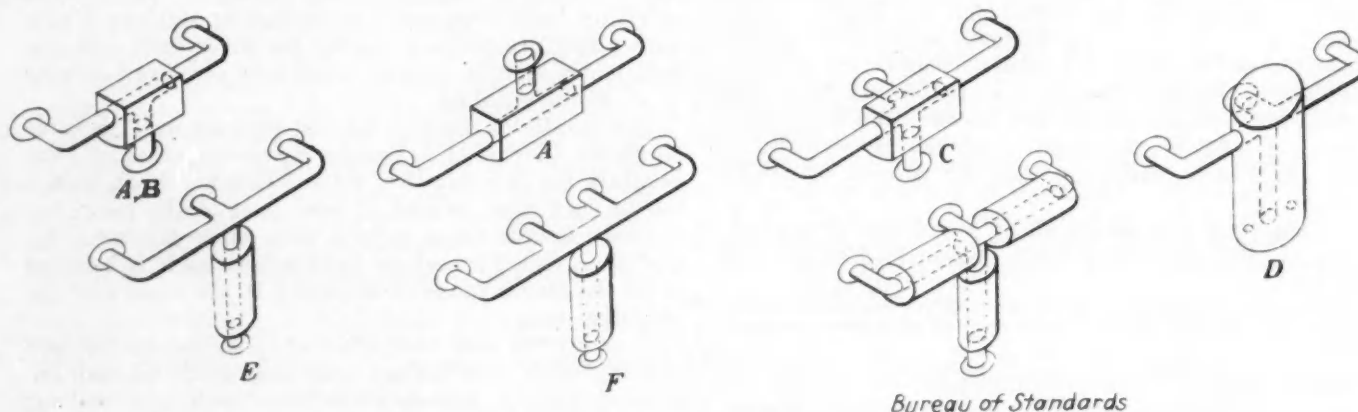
TYPES OF MANIFOLD AND MANIFOLD JACKETING OF TEST ENGINES
